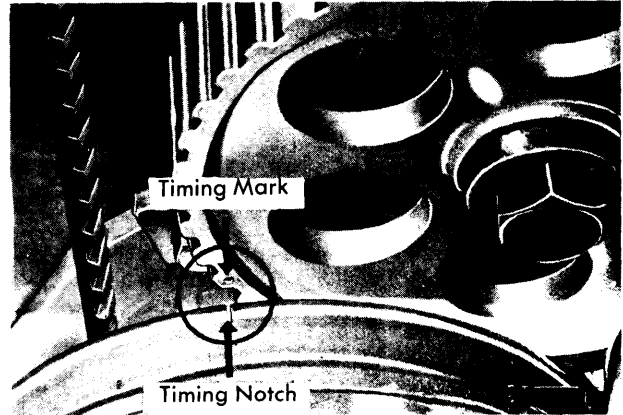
Location of Crankshaft & Intermediate Shaft Timing Marks
